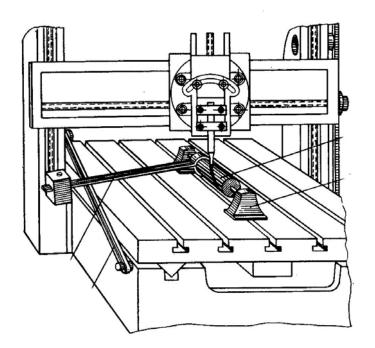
Attachment in planing machine for cutting long lead helical grooves.
